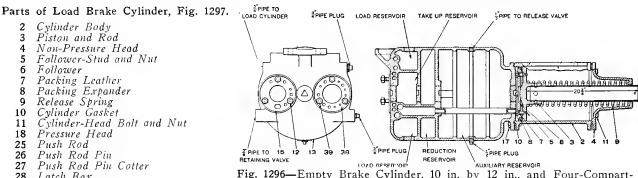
Empty Brake Cylinder, 10 in. by 12 in., and Four-Compartment Reservoir Combined.
